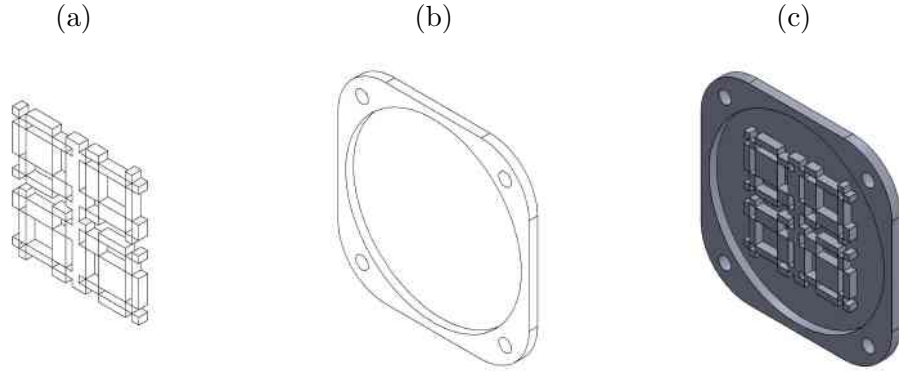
CAD Mask Design: (a) pattern (b) mould (c) final CM pattern.
